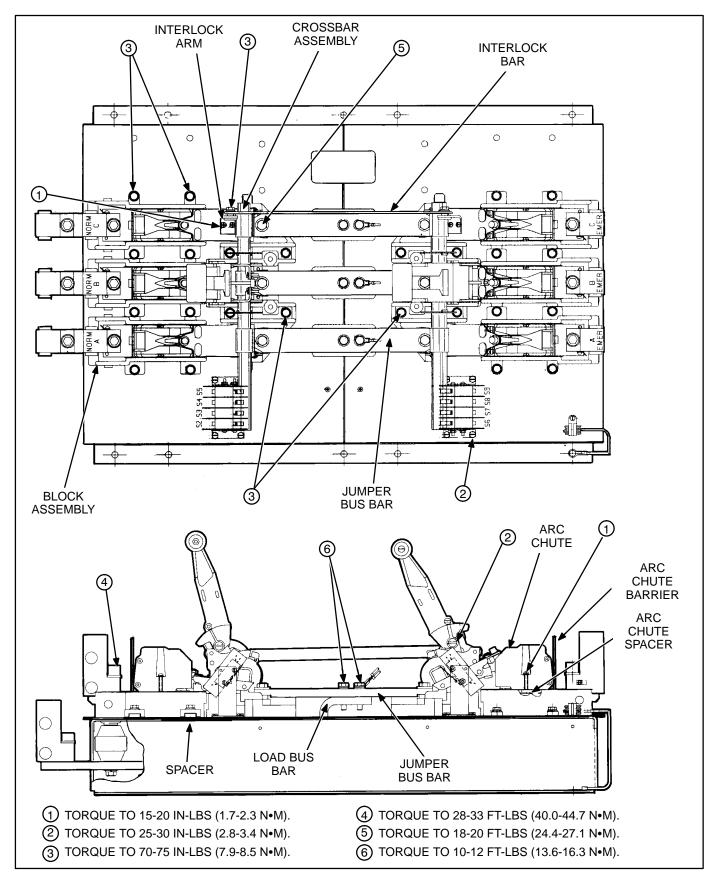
3-POLE SWITCH ASSEMBLY (800 - 1000 AMPERES)
